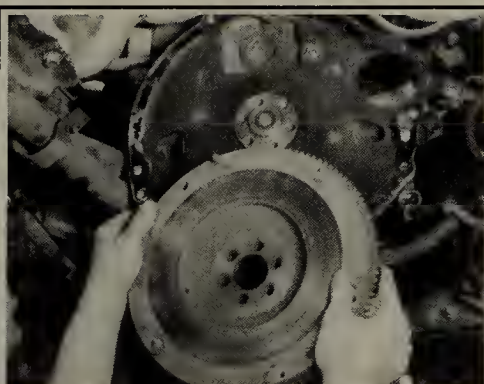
then remove the flywheel from the crankshaft in order to replace it or have it machined
